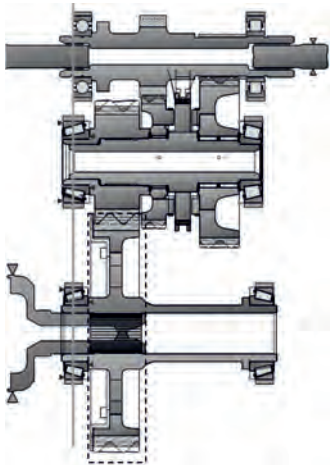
Cross-sectional view of the 2-Speed AMT Gearbox without differential. Highlighted gear pair is the final reduction
